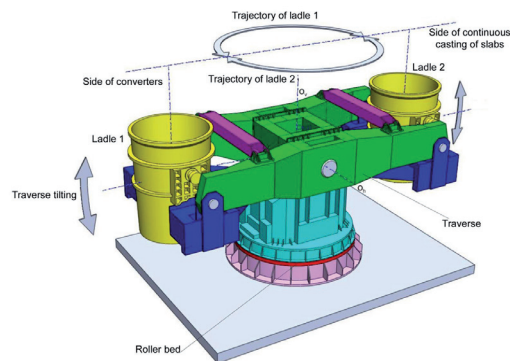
Casting pedestal ZPO2 with furnace ladles.
